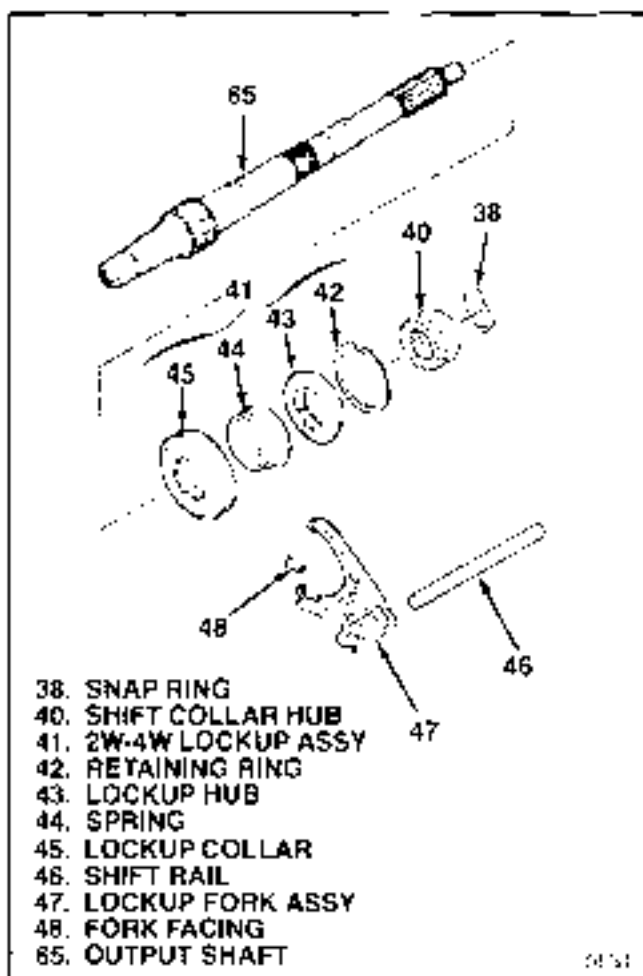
Lockup Shift Parts (Mechanical Shift)
